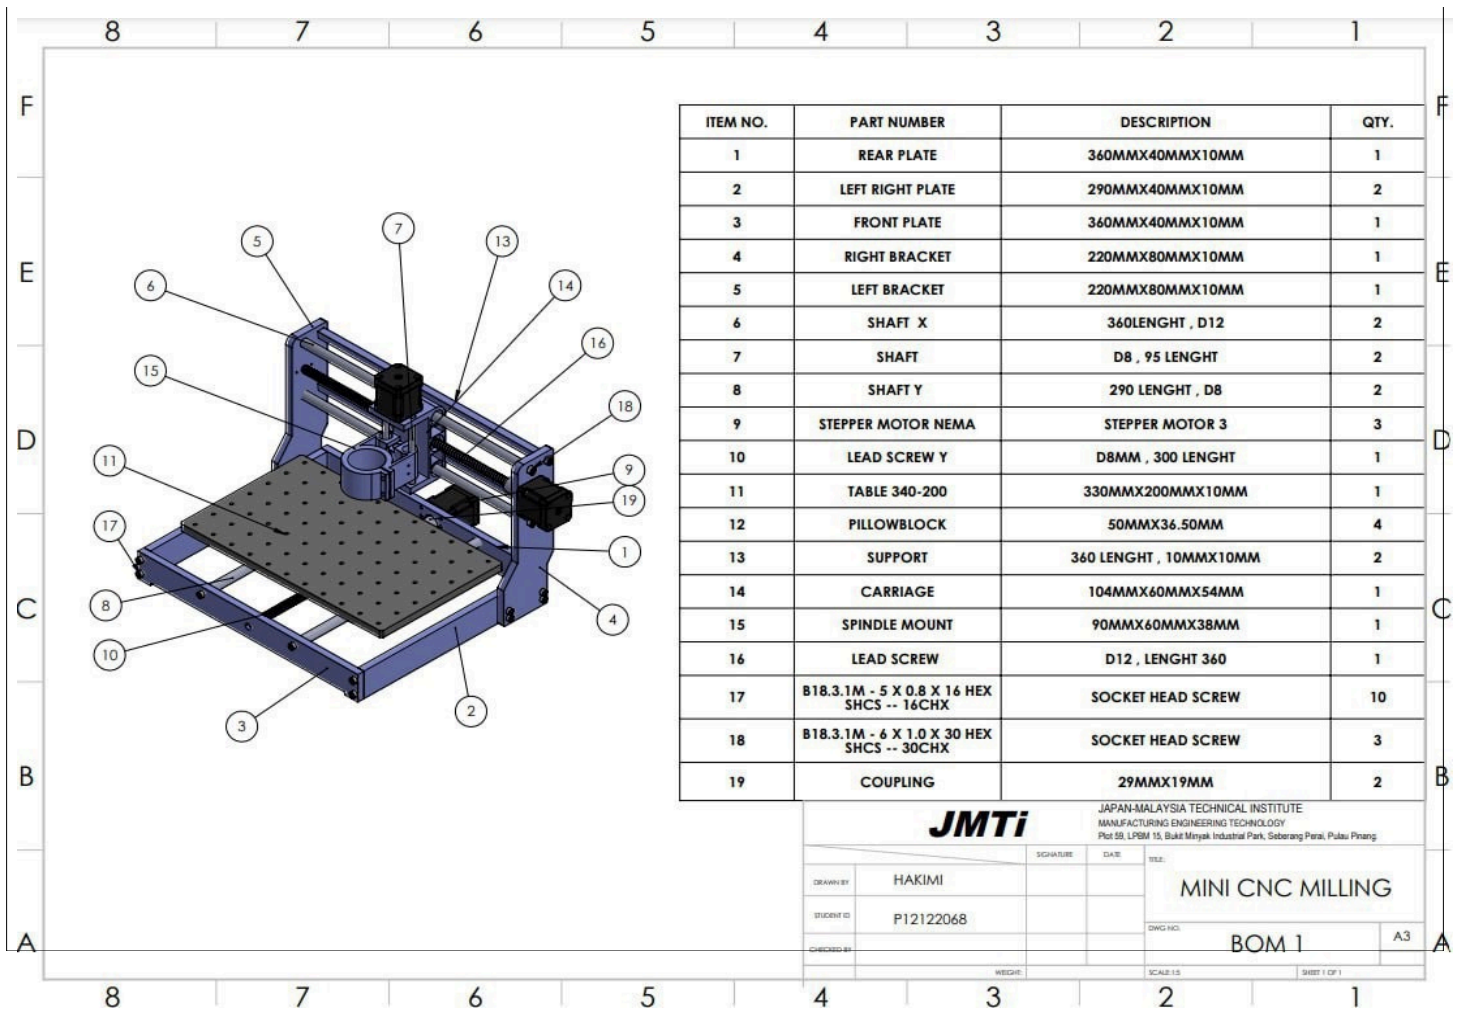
Assembly view and Bill of Materials (BOM) of the Mini CNC Milling Machine
